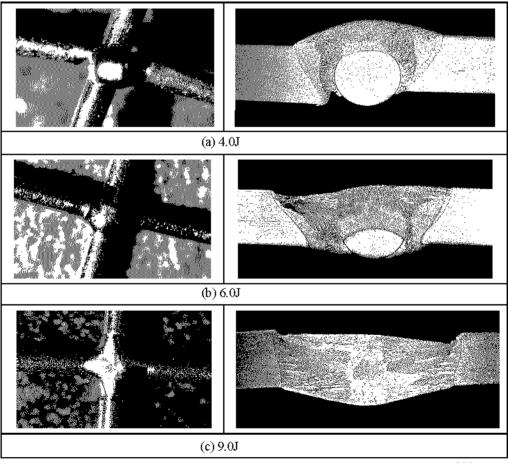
Appearance and cross section of crosswise welded joints
